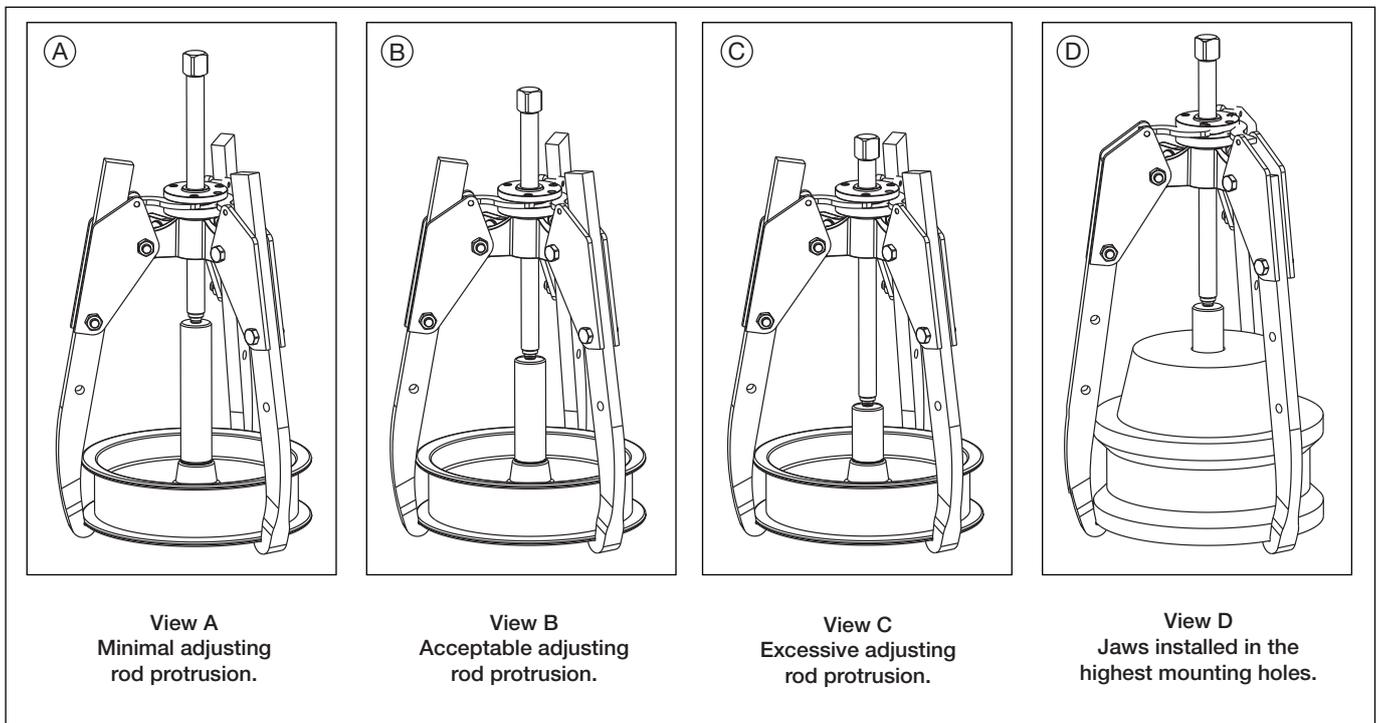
, Jaw Mounting Positions and Adjusting Rod Height
